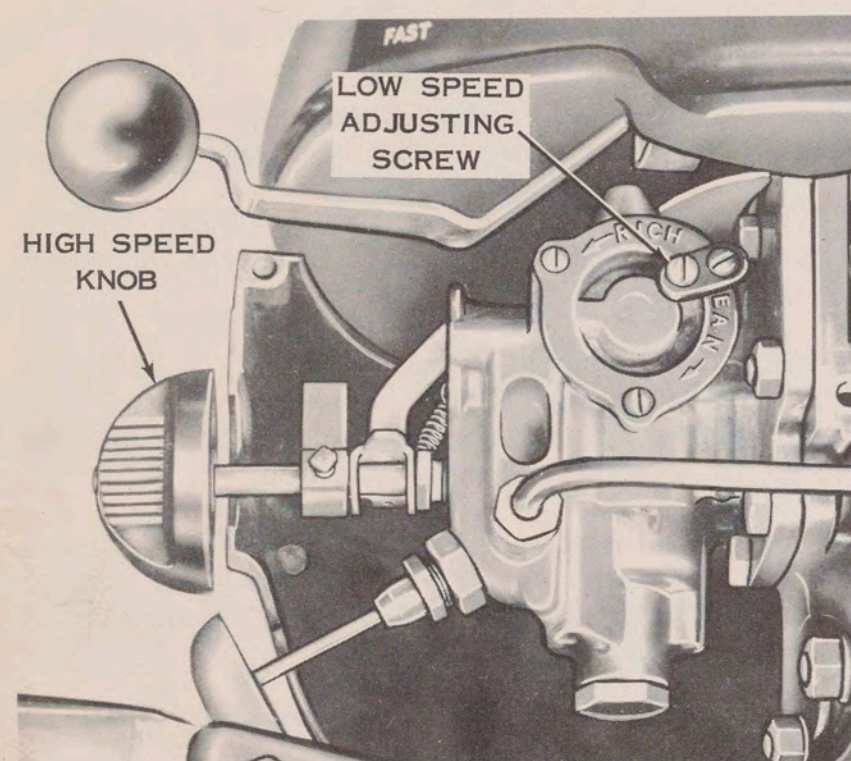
Low Speed Adjusting Screw for 3 and 5 H.P. Models
